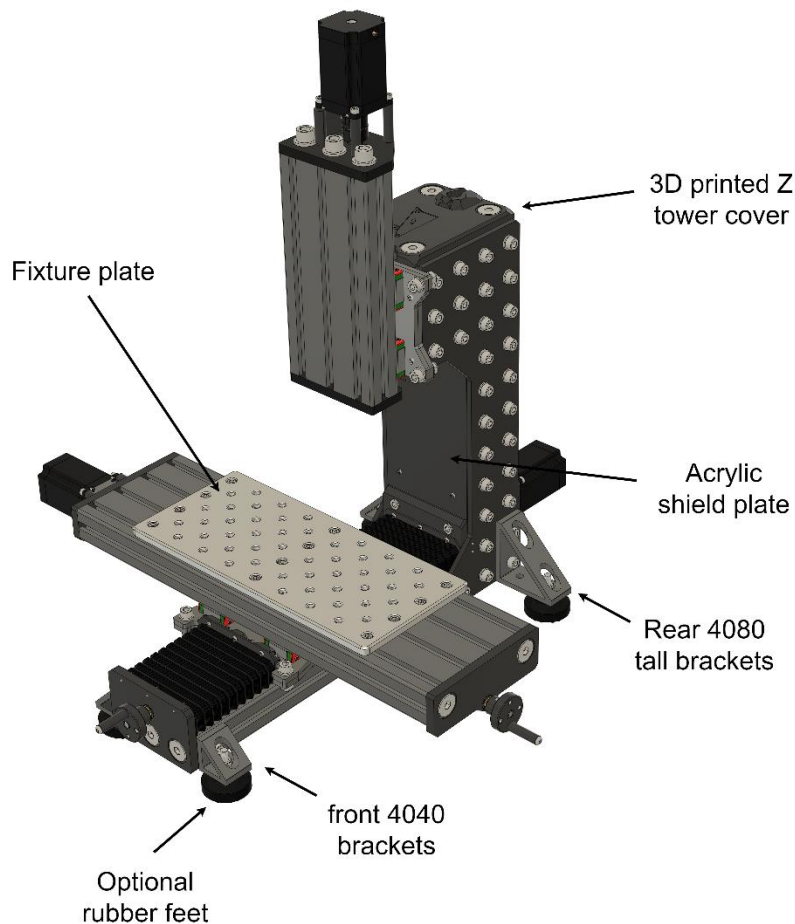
Mechanical assembly of the Mill machine with the fixture plate, front and rear support brackets, acrylic shield panel, z tower printed part and optional rubber feet.
